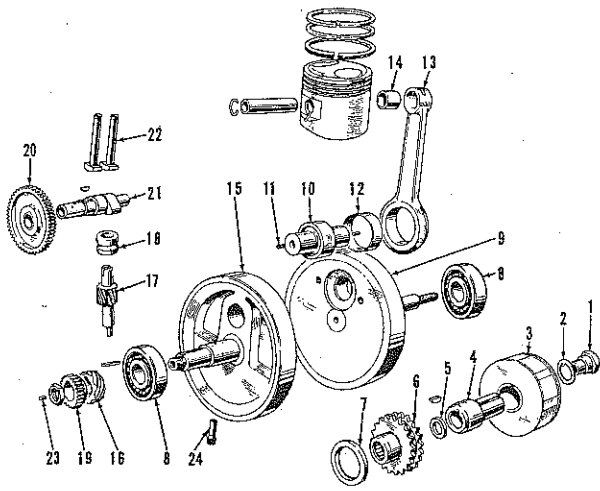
Exploded view of the late type crankshaft and associated parts.
